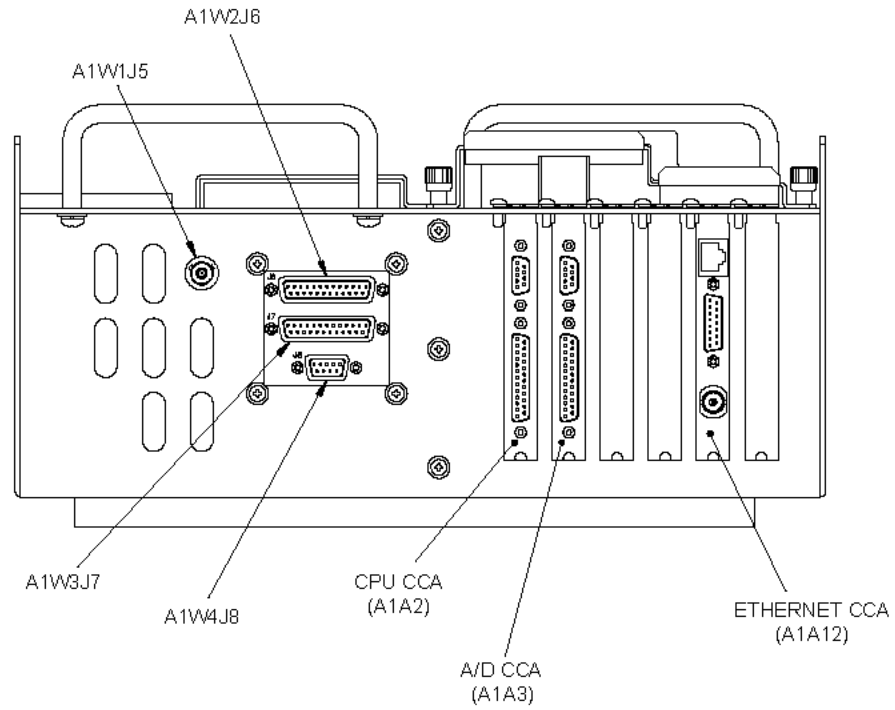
Removal of Power Supply/Card Cage Assembly (A1)
